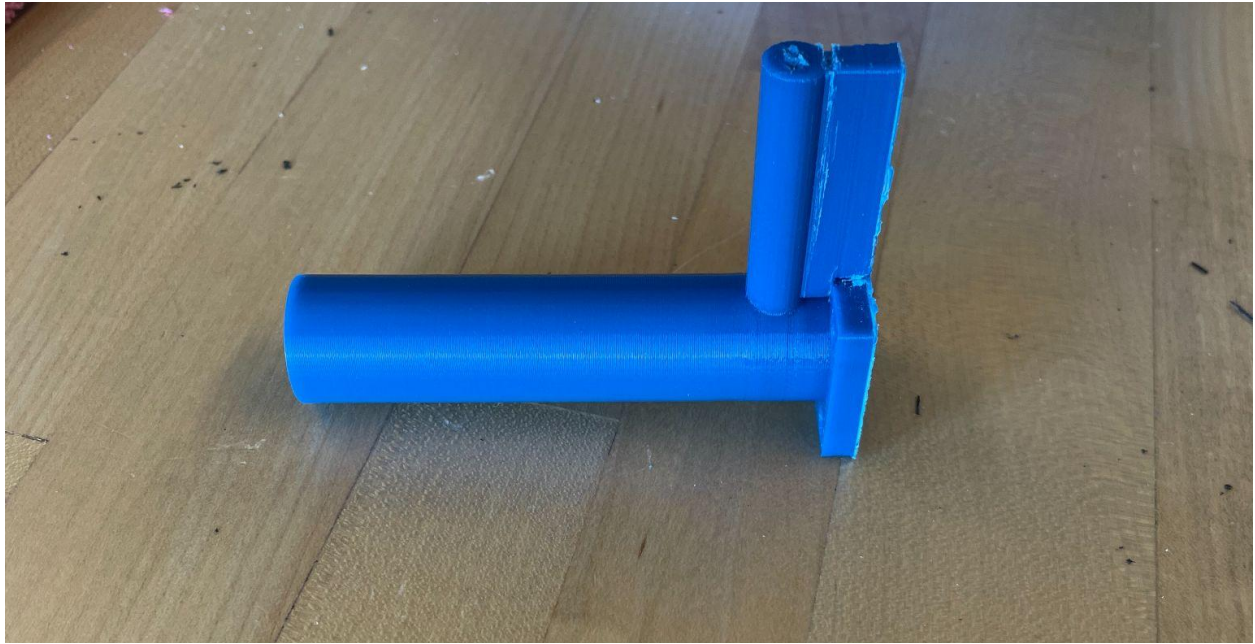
Example of 3D printed piece (of part 2)
